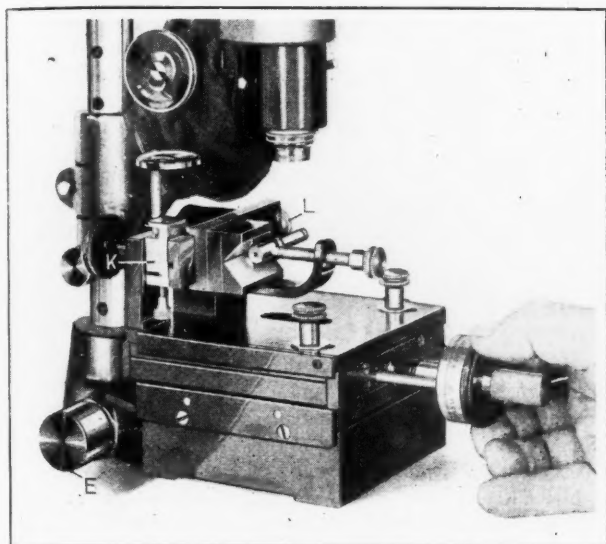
Device employed to tilt a Screw when inspecting it in the Toolmaker's Microscope
